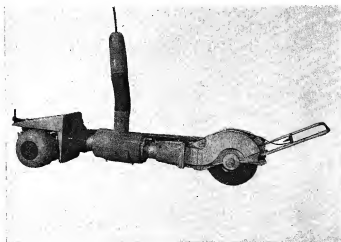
General View of the E.S.C.—type 20 in. dia. Swing-Frame Grinding Machine.
